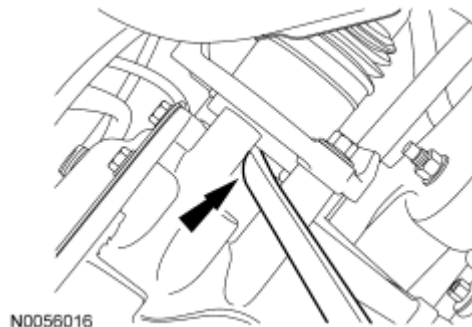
Removing Halfshaft Using A Suitable Pry Bar
